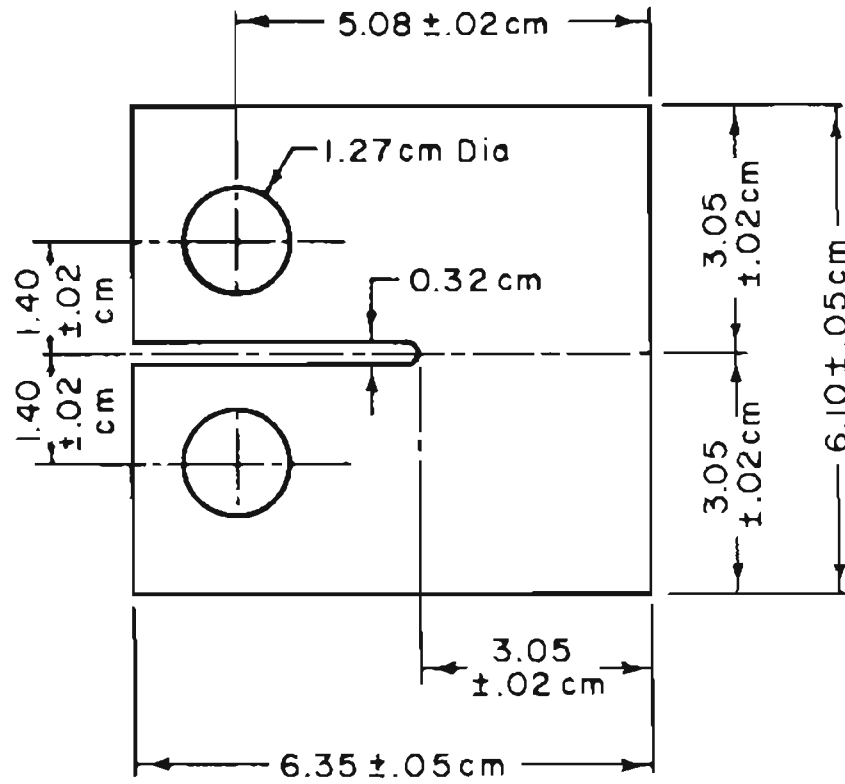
GEOMETRY OF COMPACT TENSION FRACTURE TOUGHNESS SPECIMEN.
